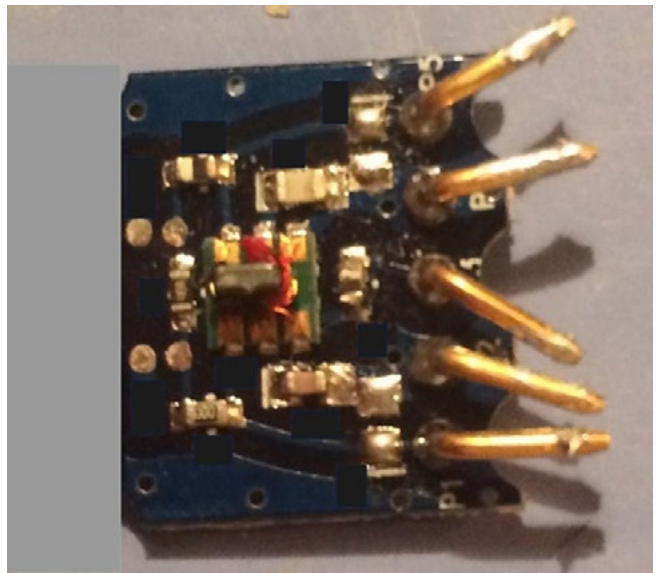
Standard pin post-reflow daughter board assembly using a standard paste-in-hole process.
